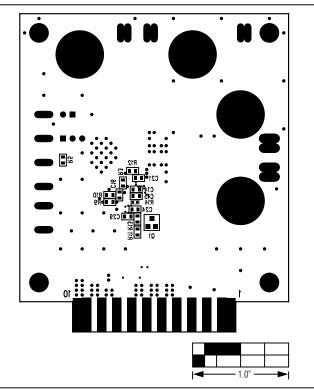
MAX15118 EV Kit Component Placement Guide— Solder Side
